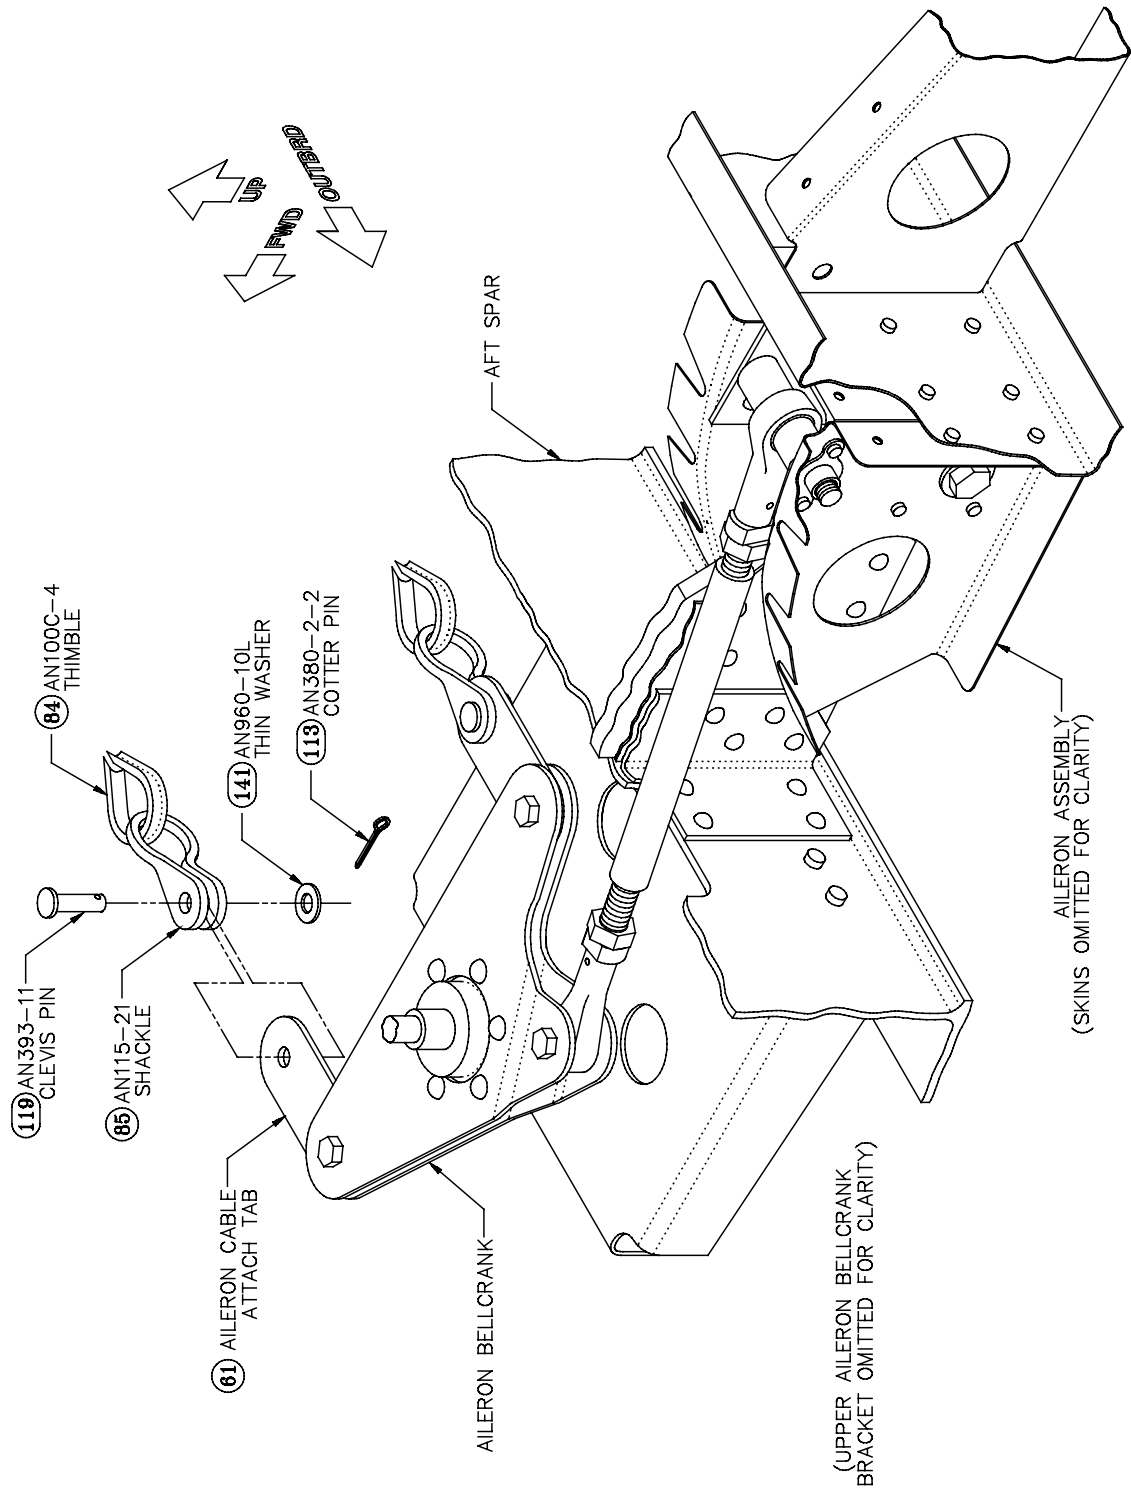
Shackle Attachment to Aileron Control Cable Attach Tab
